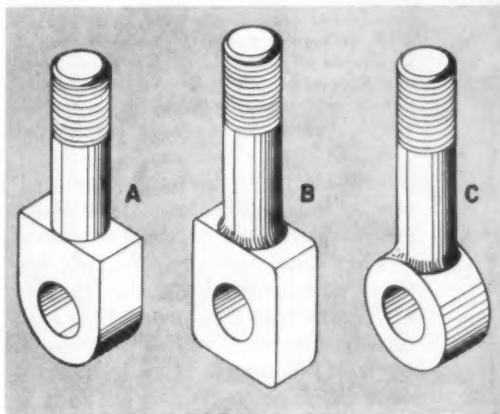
(A) Single-piece swinging bolt, standard with several jig and fixture part makers; (B) bolt similar to bolt (A) but made in two pieces, welded together; and (C) bolt made of two cylindrical pieces welded together.
